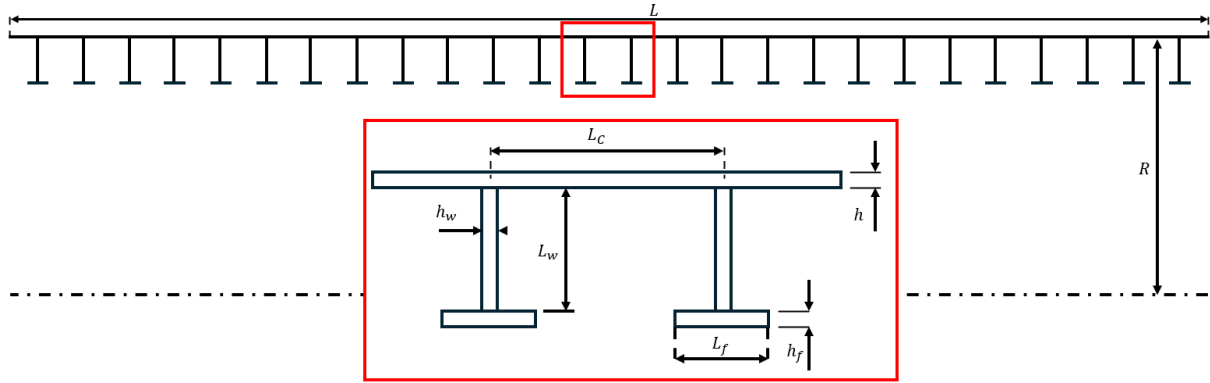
Illustration of the Seahorse mid-section pressure hull geometry and dimensions.
